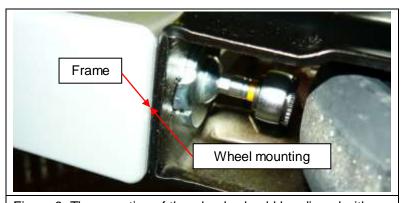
The mounting of the wheels should be aligned with the front of the frame
